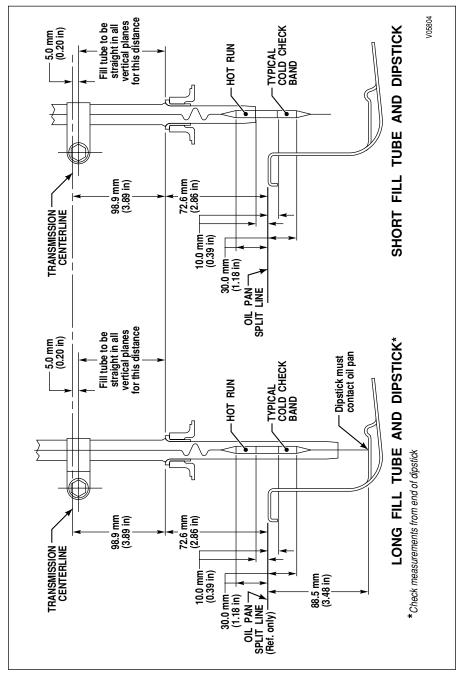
Fill Tube And Dipstick Requirements (Shallow Oil Pan)
